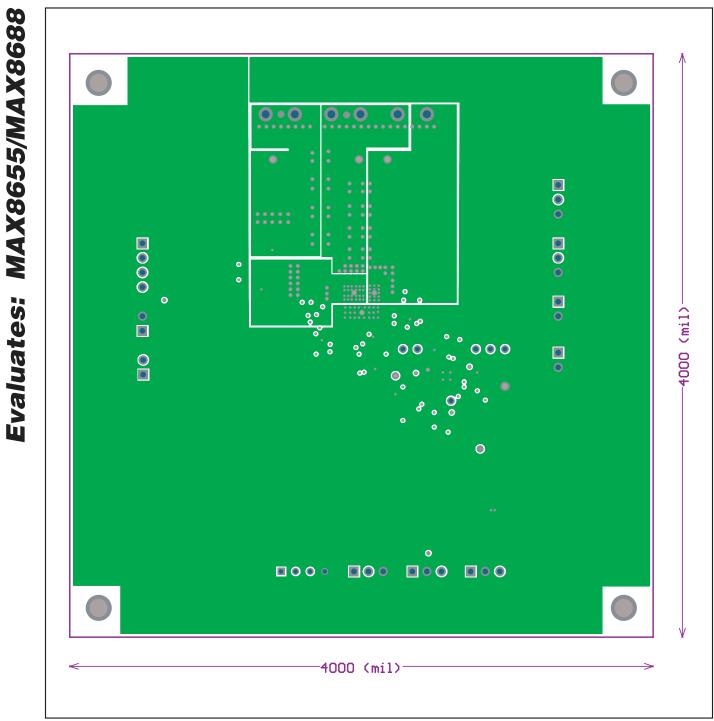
MAX8655 EV Kit PCB Layout—Inner Layer 3
